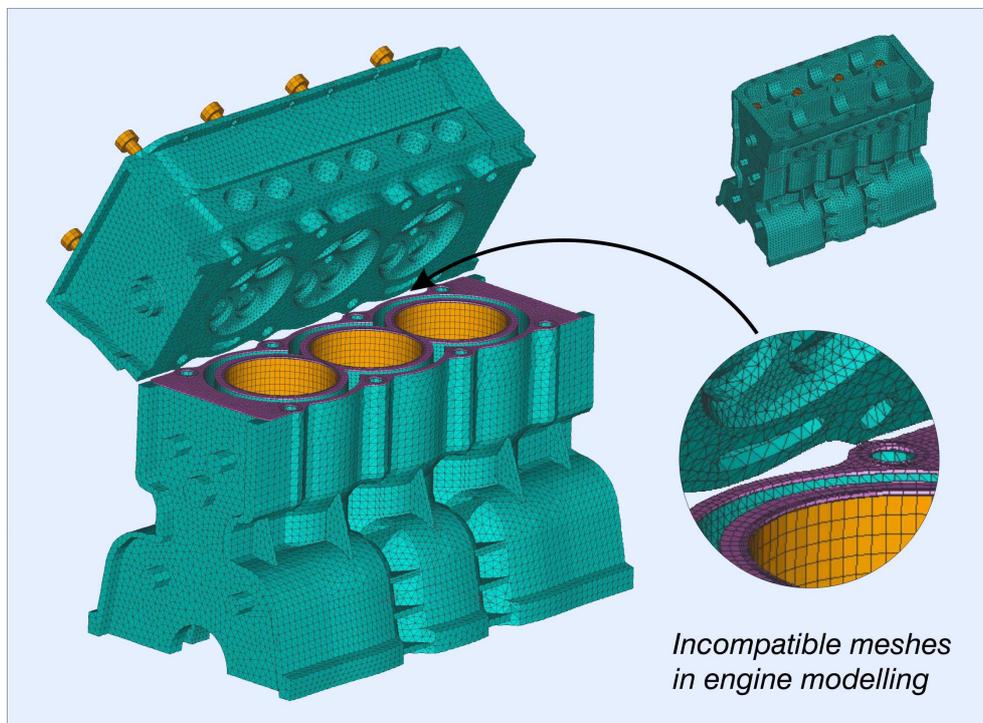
Engine model with cylinder head, engine block, liners, bolts, and gasket
